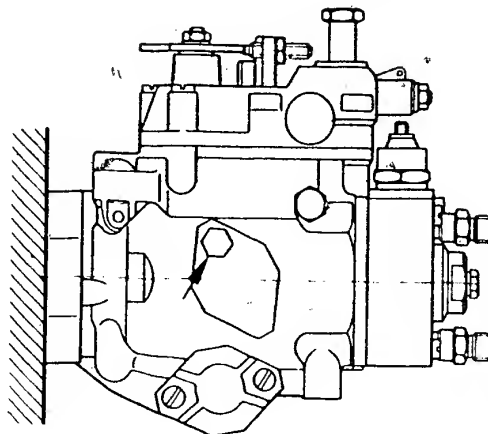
Distributor-type fuel-injection pump drawn horizontal for better view.
